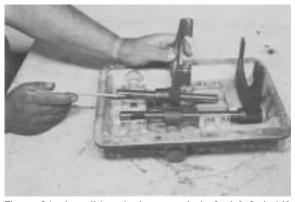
Install interlock cross pin in 2nd & 3rd shift rail. Position 2nd & 3rd shift rail and fork assembly in rail groove over mesh lock ball and spring. Make certain cross pin is in position in rail. (See Figure 78-A).
